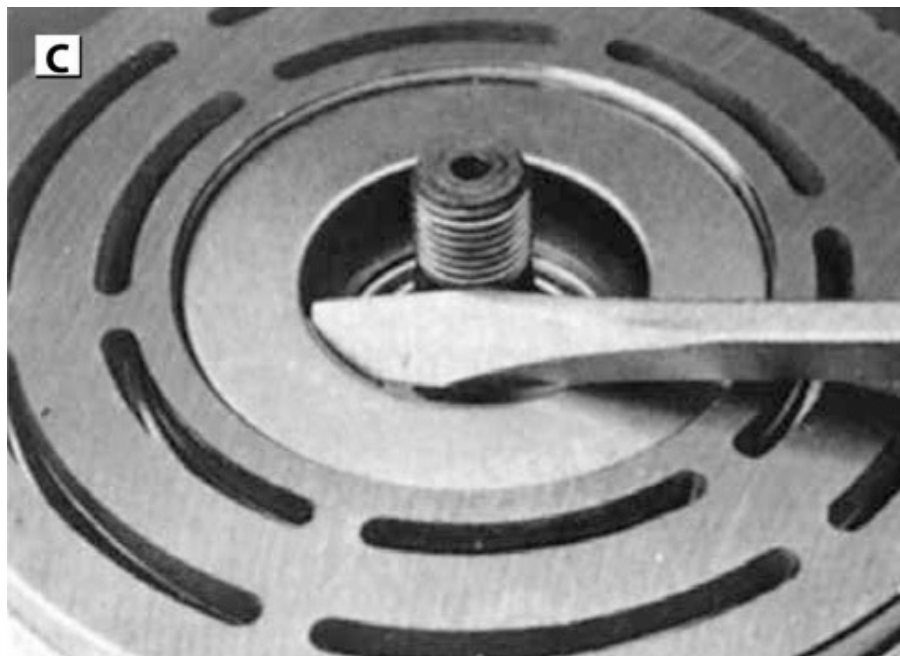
C. For HD-series compressors, remove bearing dust cover as shown.
